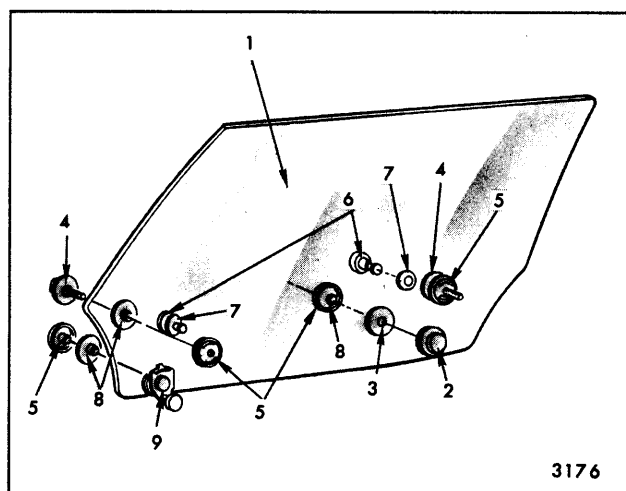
Front Door Window Assembly - "B-39" and "C-39, 49 and 69" Styles
